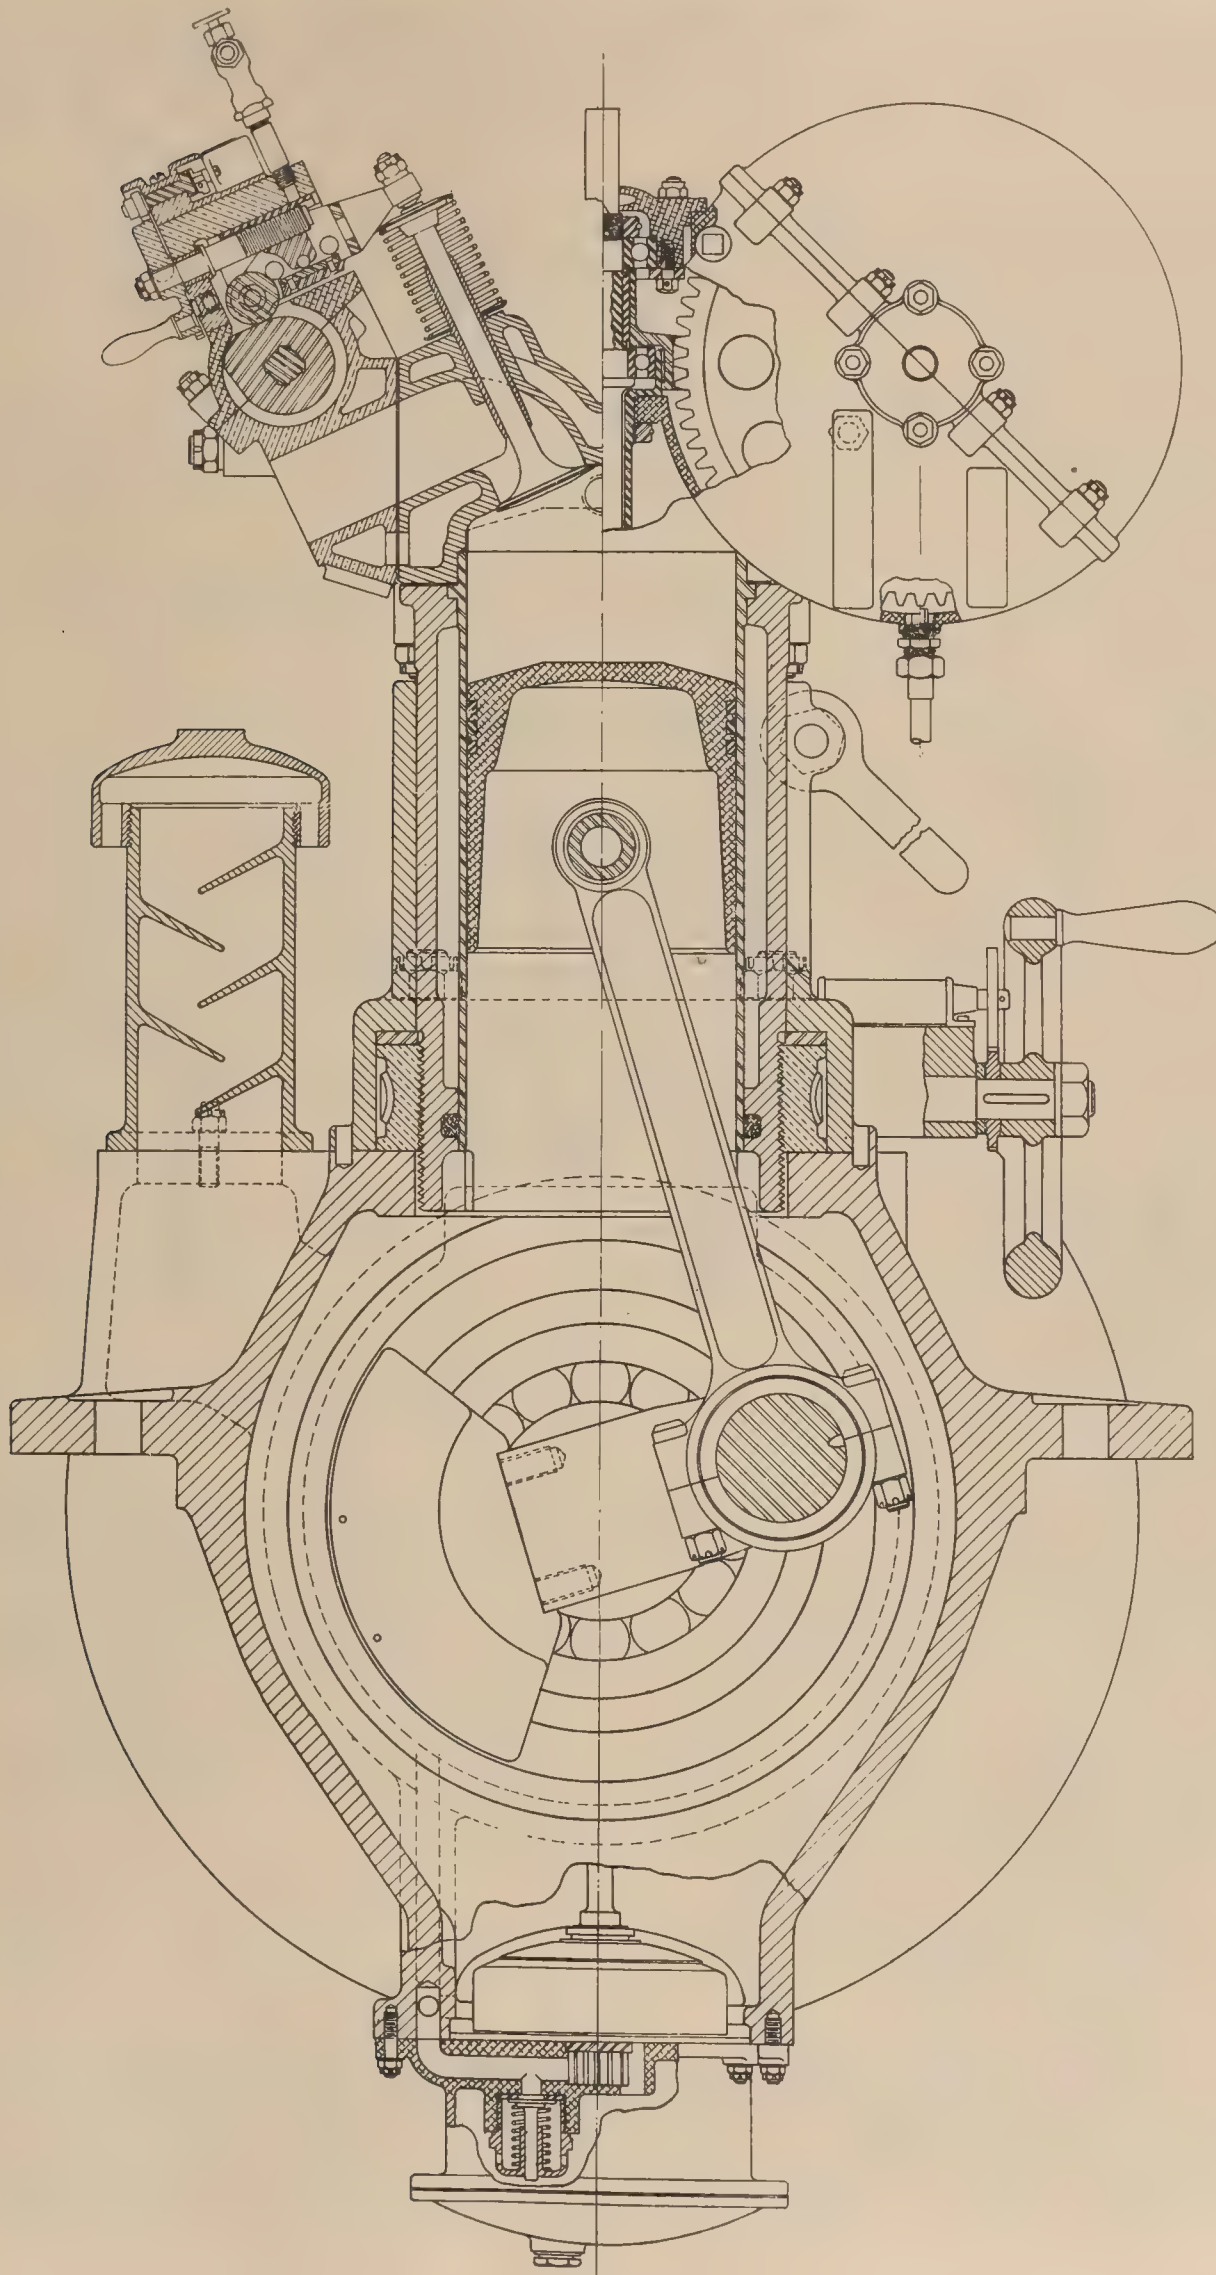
Transverse section through single-cylinder test engine, showing adjustment for varying the compression ratio while running
